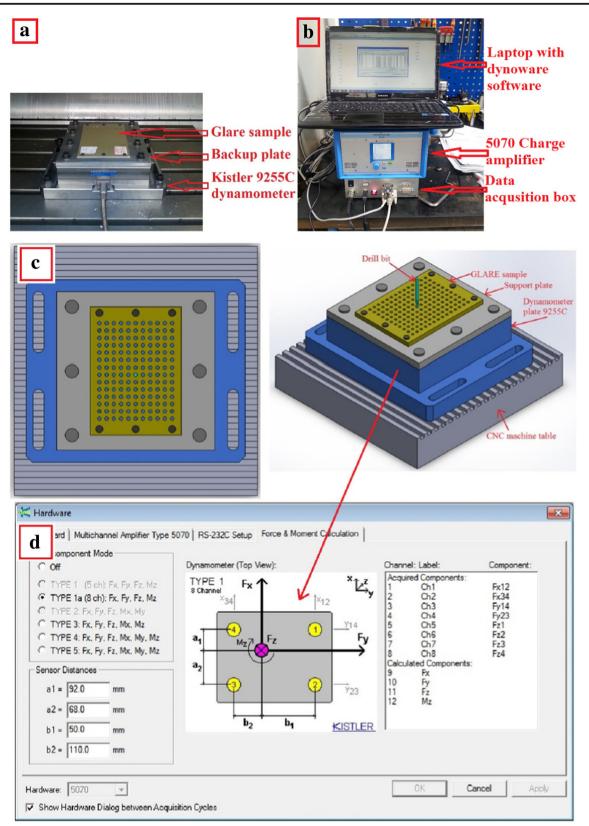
a Workpiece and dynamometer assembly inside CNC machine. b Dynamometer force measurement setup [9, 12, 59]. c 3D views of the setup of the dynamometer, the support plate, and the workpiece inside the CNC machine [59]. d DynoWare software torque calculations setup and data input [59]
